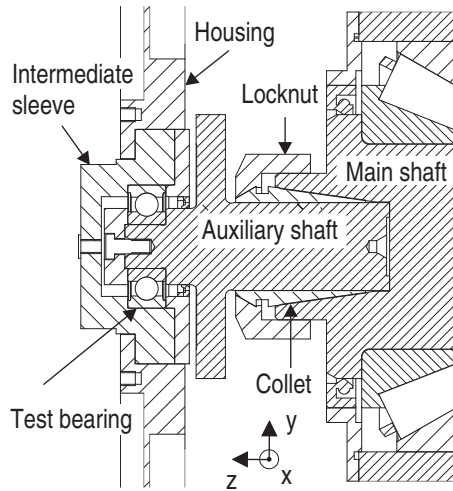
Components of the modular mounting system of the test bearing. The test bearing is mounted on an auxiliary shaft and mounted in an intermediate sleeve, adapted to its dimensions.
